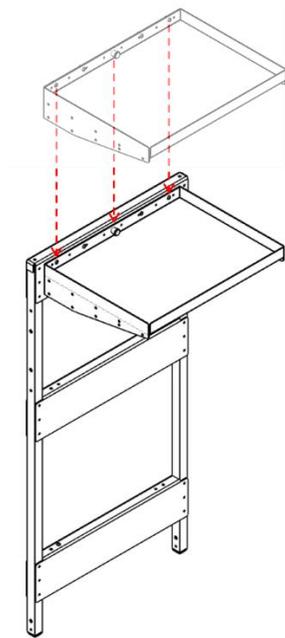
Install quick-pins into guardrail receivers of service deck.
